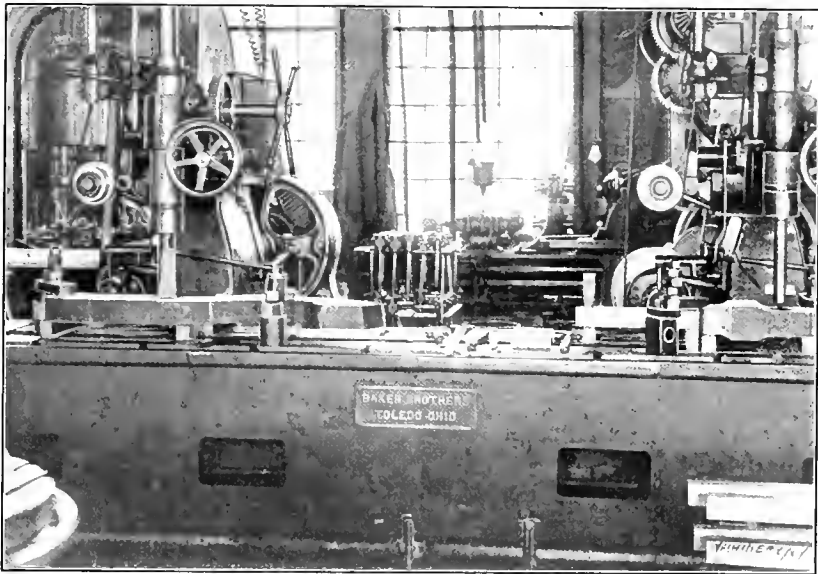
Drilling Radius Rod Extension and Walschaerts Links
